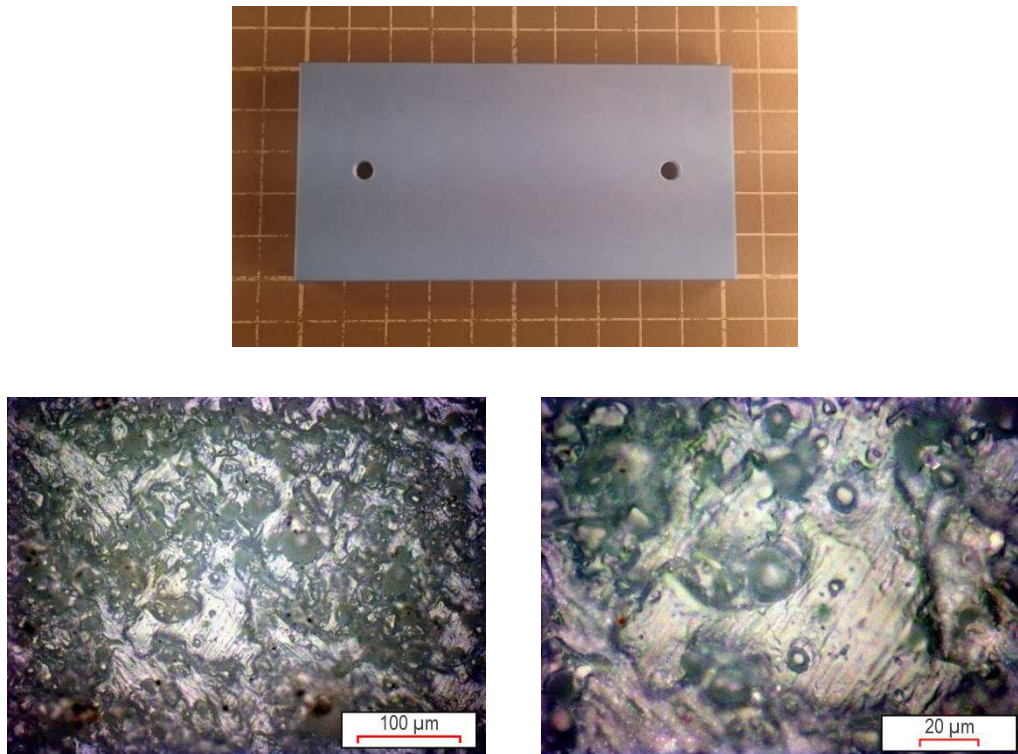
Sample II before testing. Top: Machined bearing pad. Bottom Left and Right: Surface images
